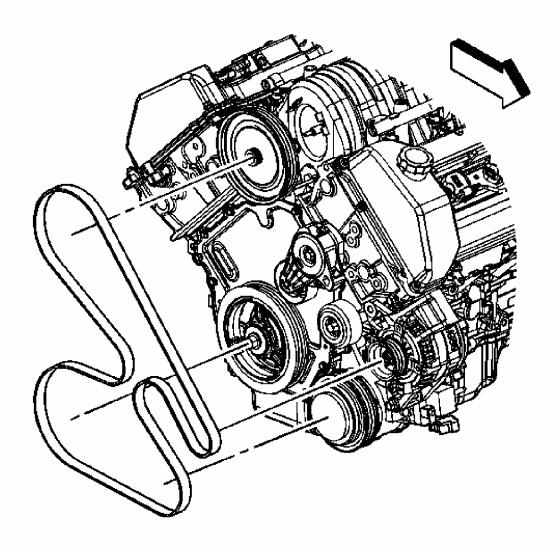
Identifying Drive Belt Courtesy of GENERAL MOTORS CORP.
